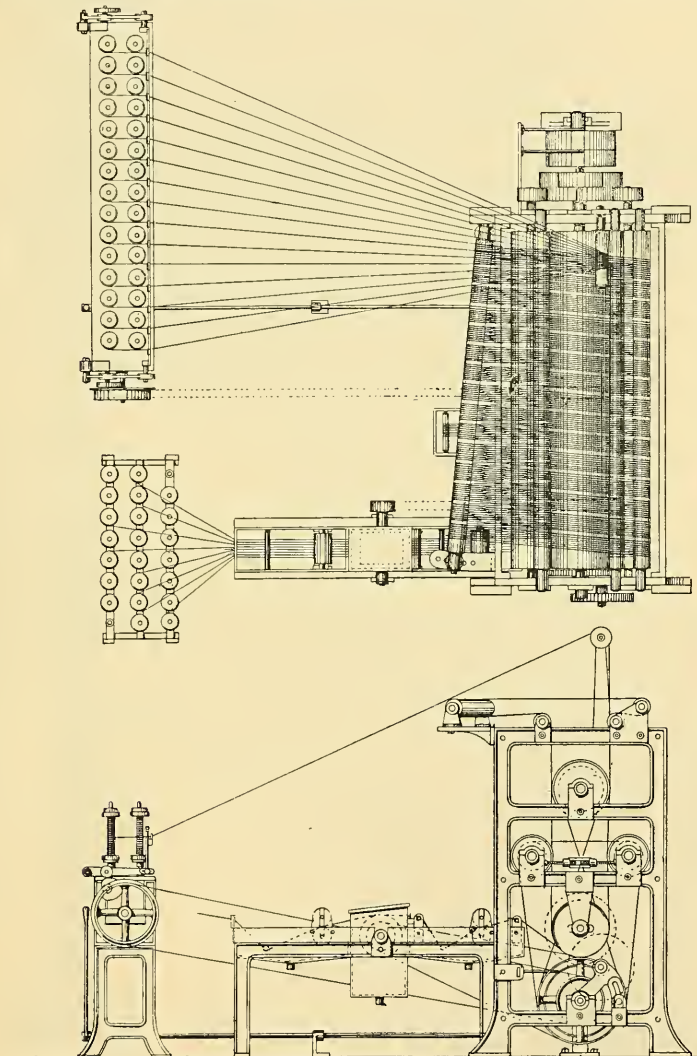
Twine polishing machine. (Made by Mr Wm. Bywater, L. eds.)
